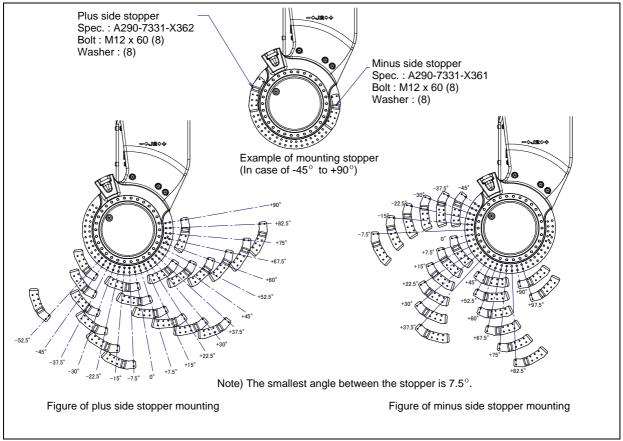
(c) Mounting of J2-Axis adjustable mechanical stopper (Option) (M-2000iA/1200/900L)
